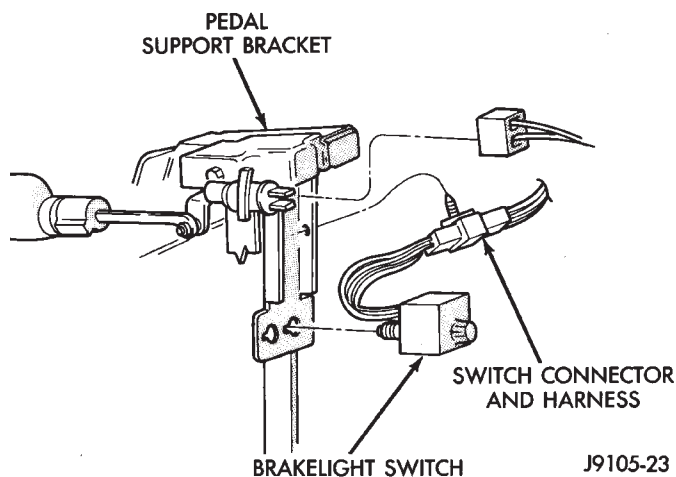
Brakelight Switch Mounting And Location (XJ/YJ)
